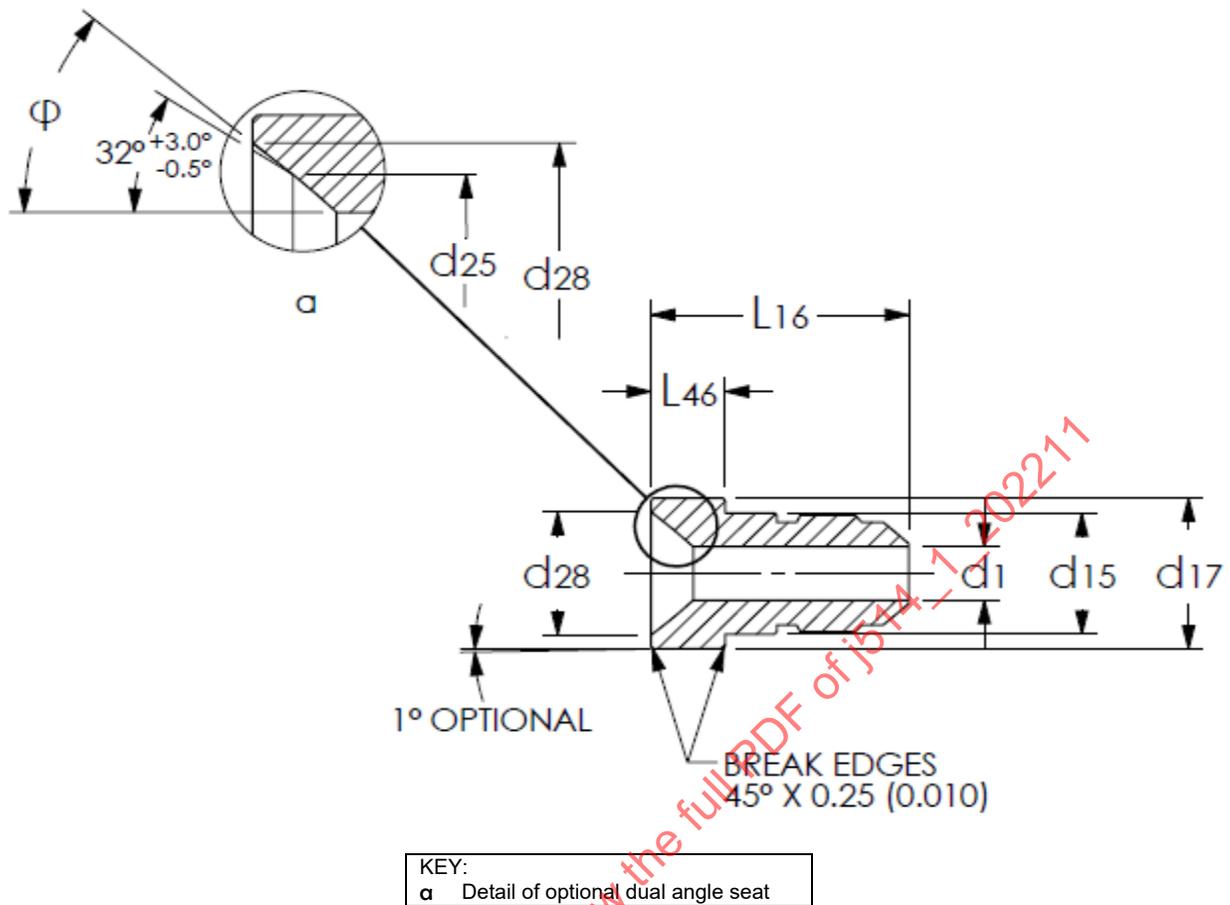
Reducing adapter (070123)⁽¹⁾⁽²⁾
